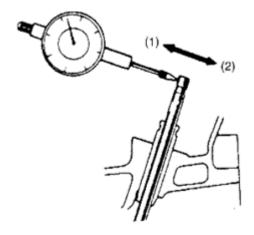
Checking Valve Stem End Deflection Courtesy of SUZUKI OF AMERICA CORP.
